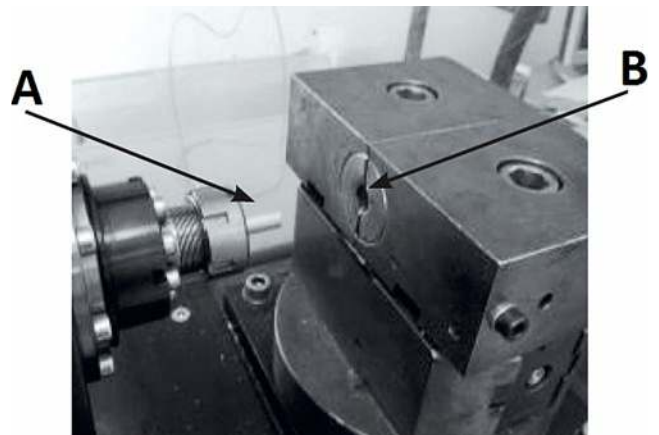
Method of fixing welded samples, rotary spindle – A, fixed handle – B
